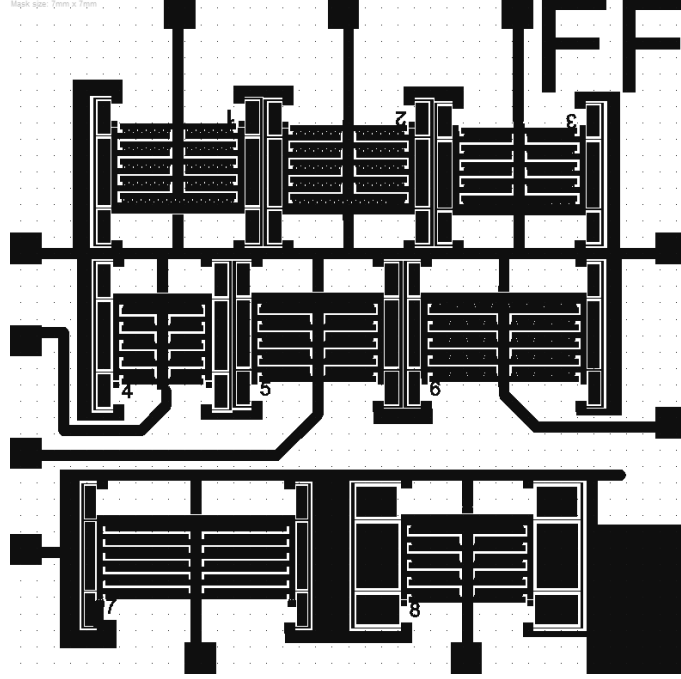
Overview of the final design with the folded flexure springs.
